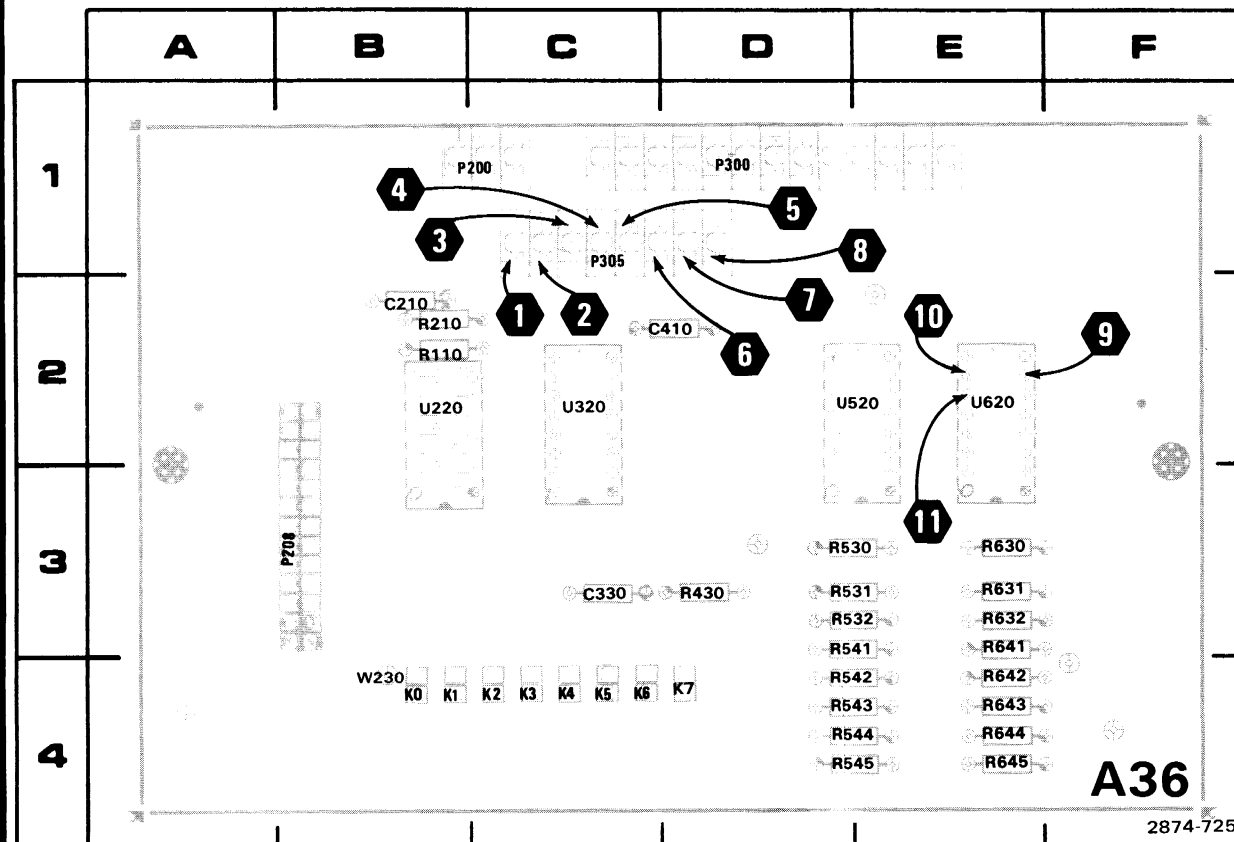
A36—Calculator Keyboard circuit board assembly.
